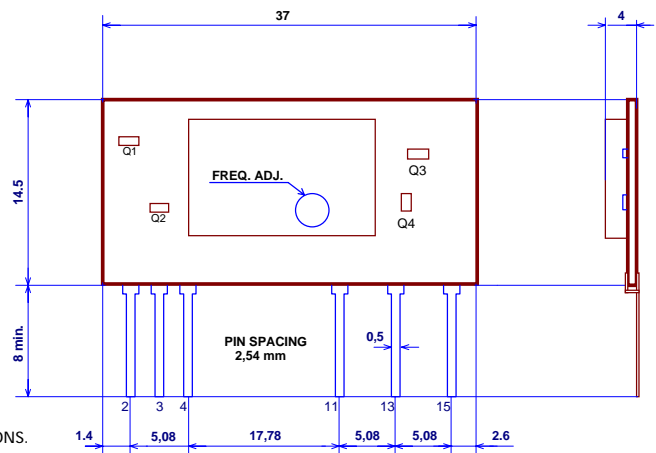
BT 57 S PHYSICAL DIMENSIONS.
